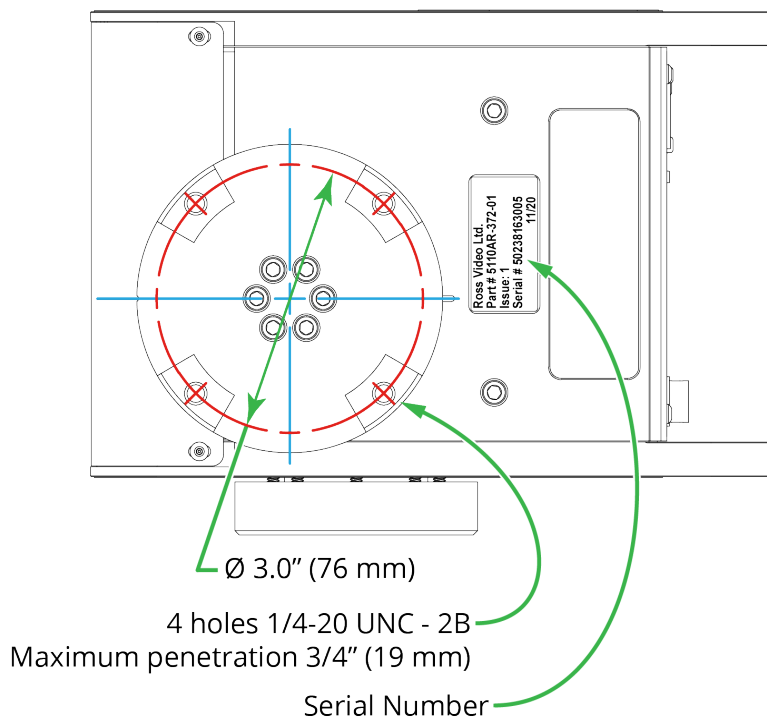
Bottom of an X300 Head, showing Mount Hole Spacing
